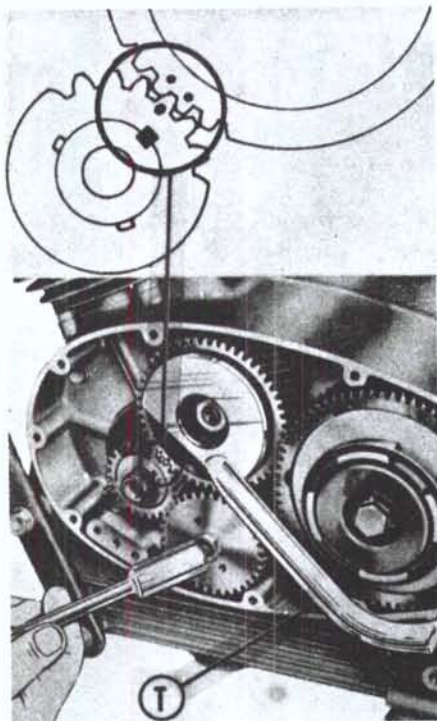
Refer to text for aligning timing marks on camshaft gear and crankshaft gear. Special tool (T) number 5591-2925 is used to hold shafts when removing gear retaining nuts.
